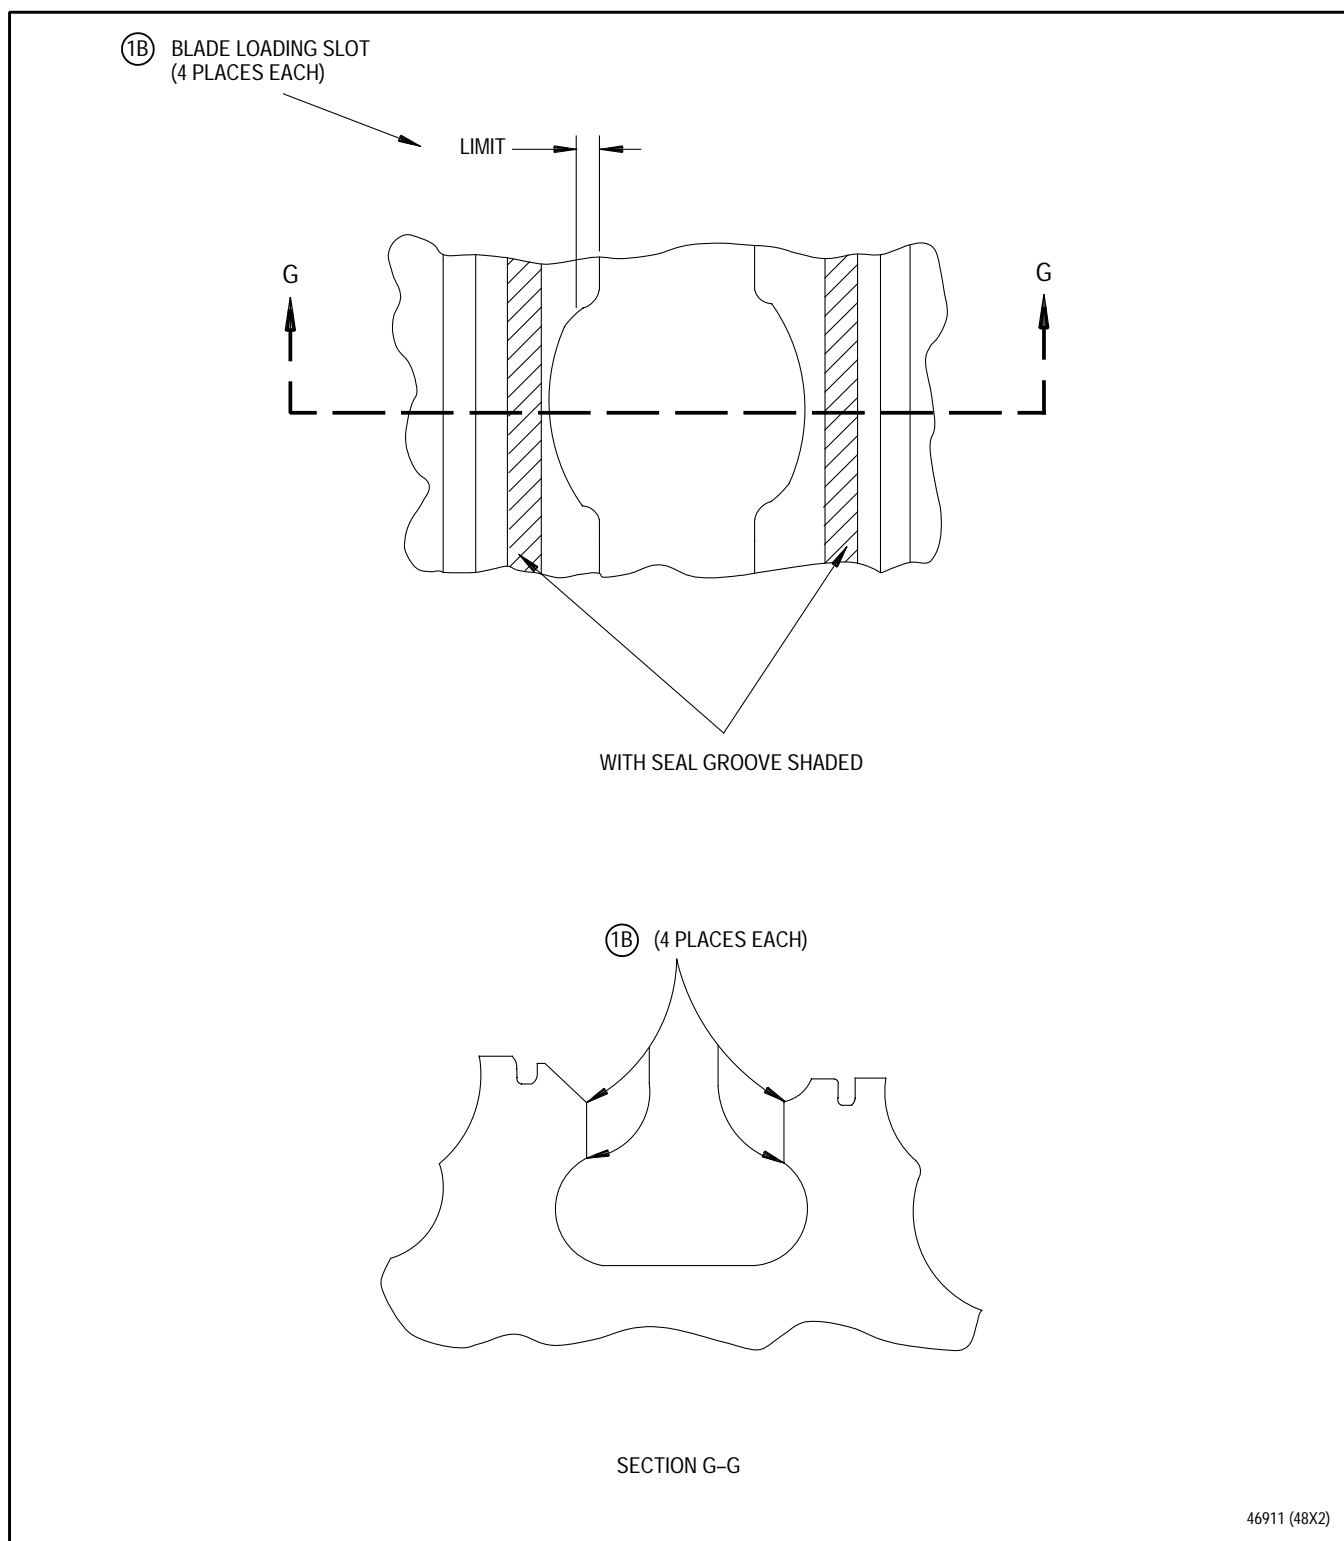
Disk-Drum Rotor, Rear Compressor, Rear, Assembly - Blend Repair (Sheet 3 of 6)
